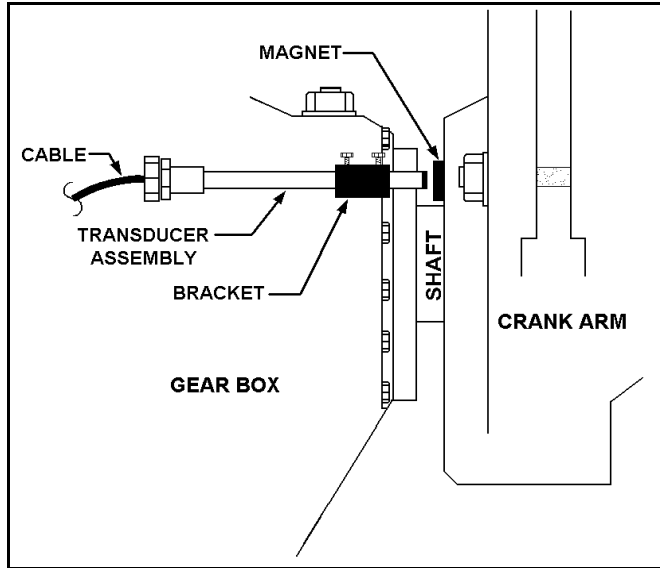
Bar Magnet Mounted on Back of Crank Arm
